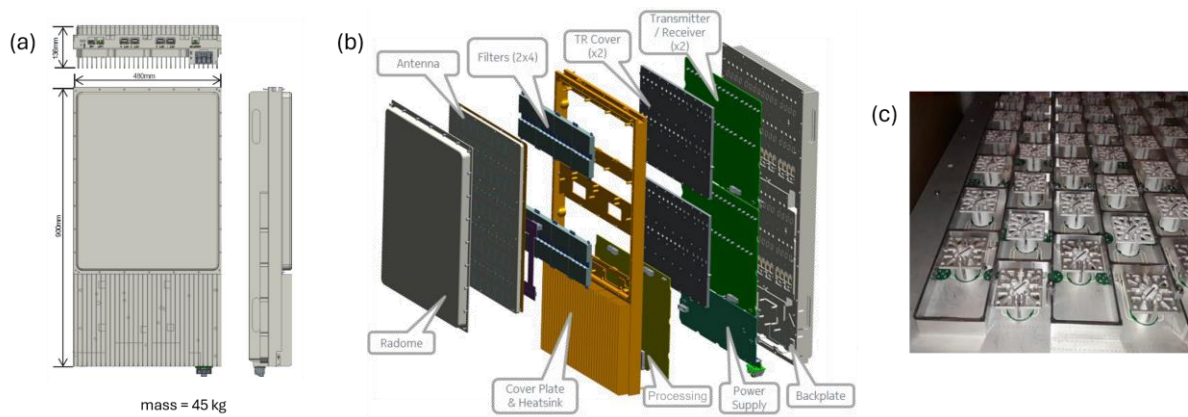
Overview of one particular AAU: (a) external view and outer dimensions, (b) exploded view of all its sub-components, and (c) picture of its antenna array [adapted from BS manufacturers' technical documentation]
